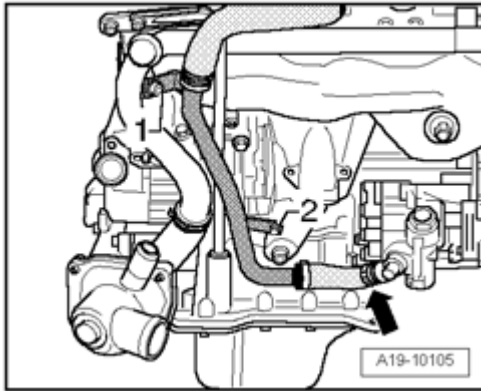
Removing Bolts & Return Pipe From Power-Steering Pump
